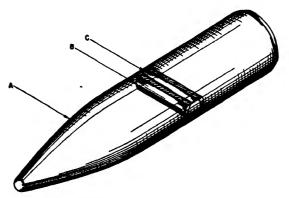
Cut-away sketch of projectile. (A) Cold-rolled steel projectile. (B) Magnetic insulator (brass sleeve). (C) Magnetized insert (hardened drill rod).
